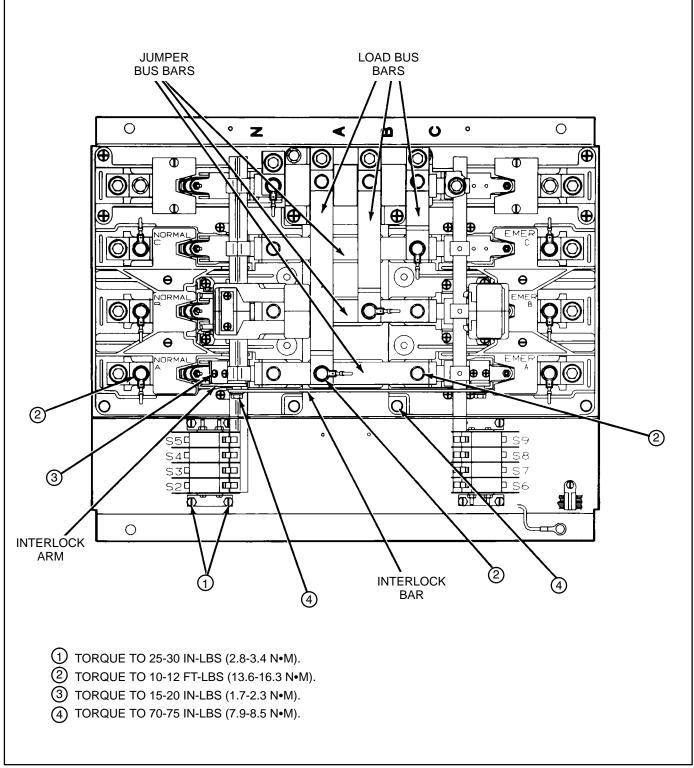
4-POLE SWITCH ASSEMBLY (150 TO 260 AMPERES)
